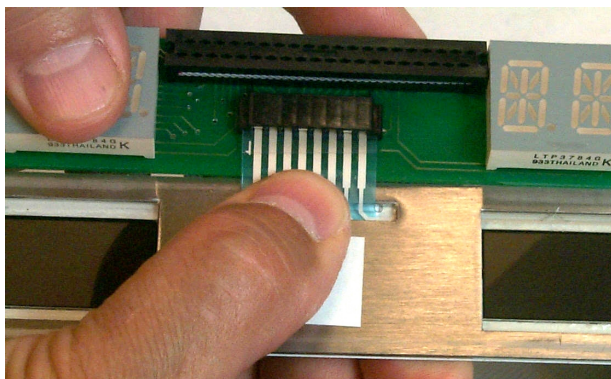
Hold the ribbon cable flat when attaching the new membrane to the display board. The non-terminated cable will not seat properly if it is allowed to bow while inserting into connector.
